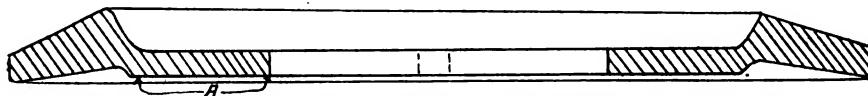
SECTIONAL VIEW OF LARGE BEVEL GEAR USED IN REAR AXLE OF SHAFT DRIVE CAR
